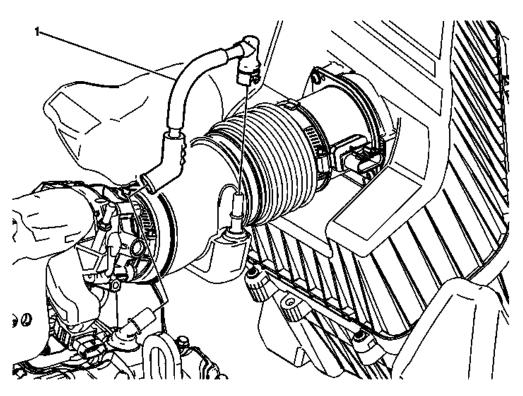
Identifying Front Positive Crankcase Ventilation Tube Courtesy of GENERAL MOTORS COMPANY
